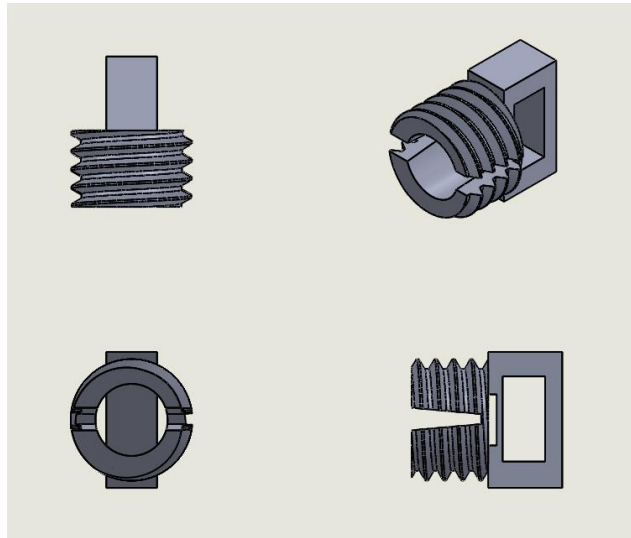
Orthogonal and isometric view of the eye camera holder joint
